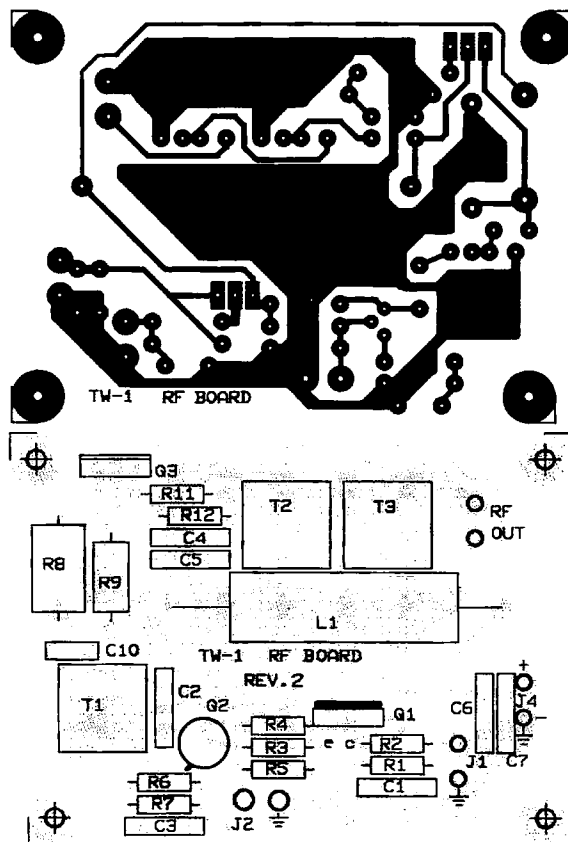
(a). PC board foil pattern of the power amplifier board. (b). Parts placement.
